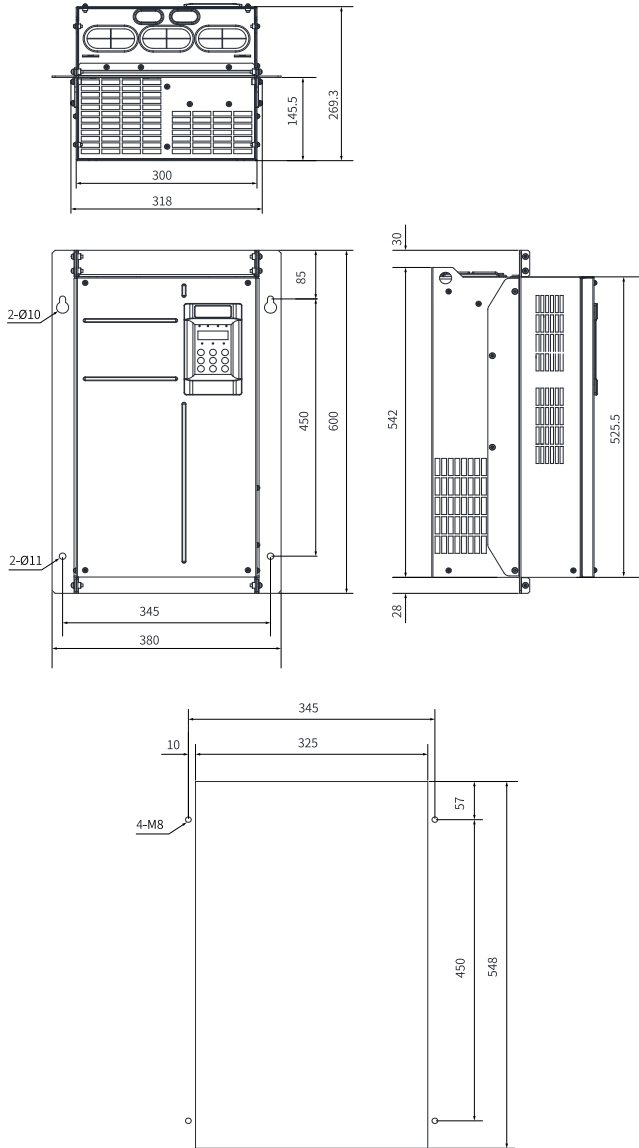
Dimensions of the MD500-AZJ-A1T7 bracket and mounting hole
